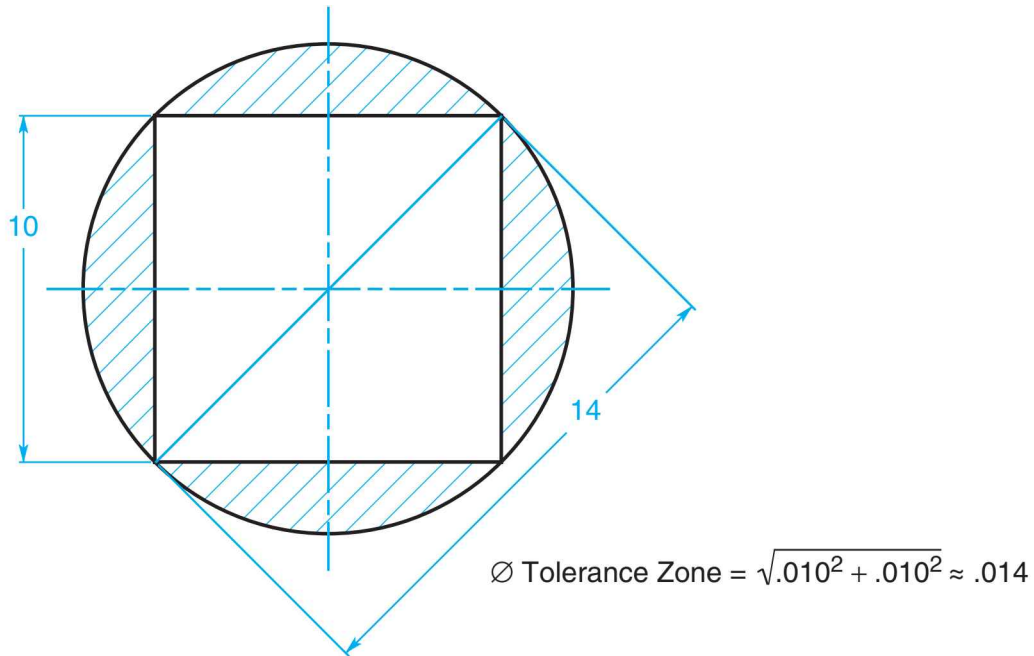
A cylindrical tolerance zone provides a uniform distance from the axis to the tolerance zone boundary.
